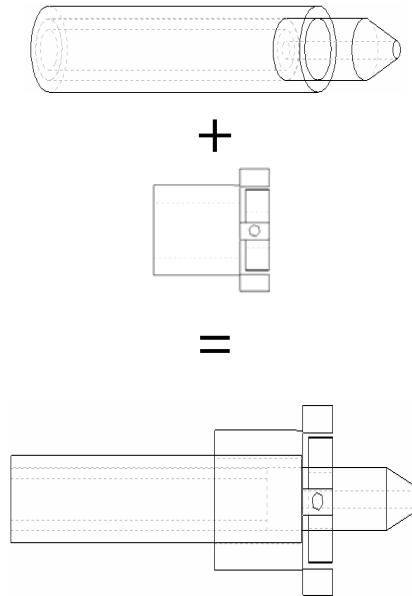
STEP 10—Wellbore Nozzle/Tube Adapter and Pipe Clamp Assembly
